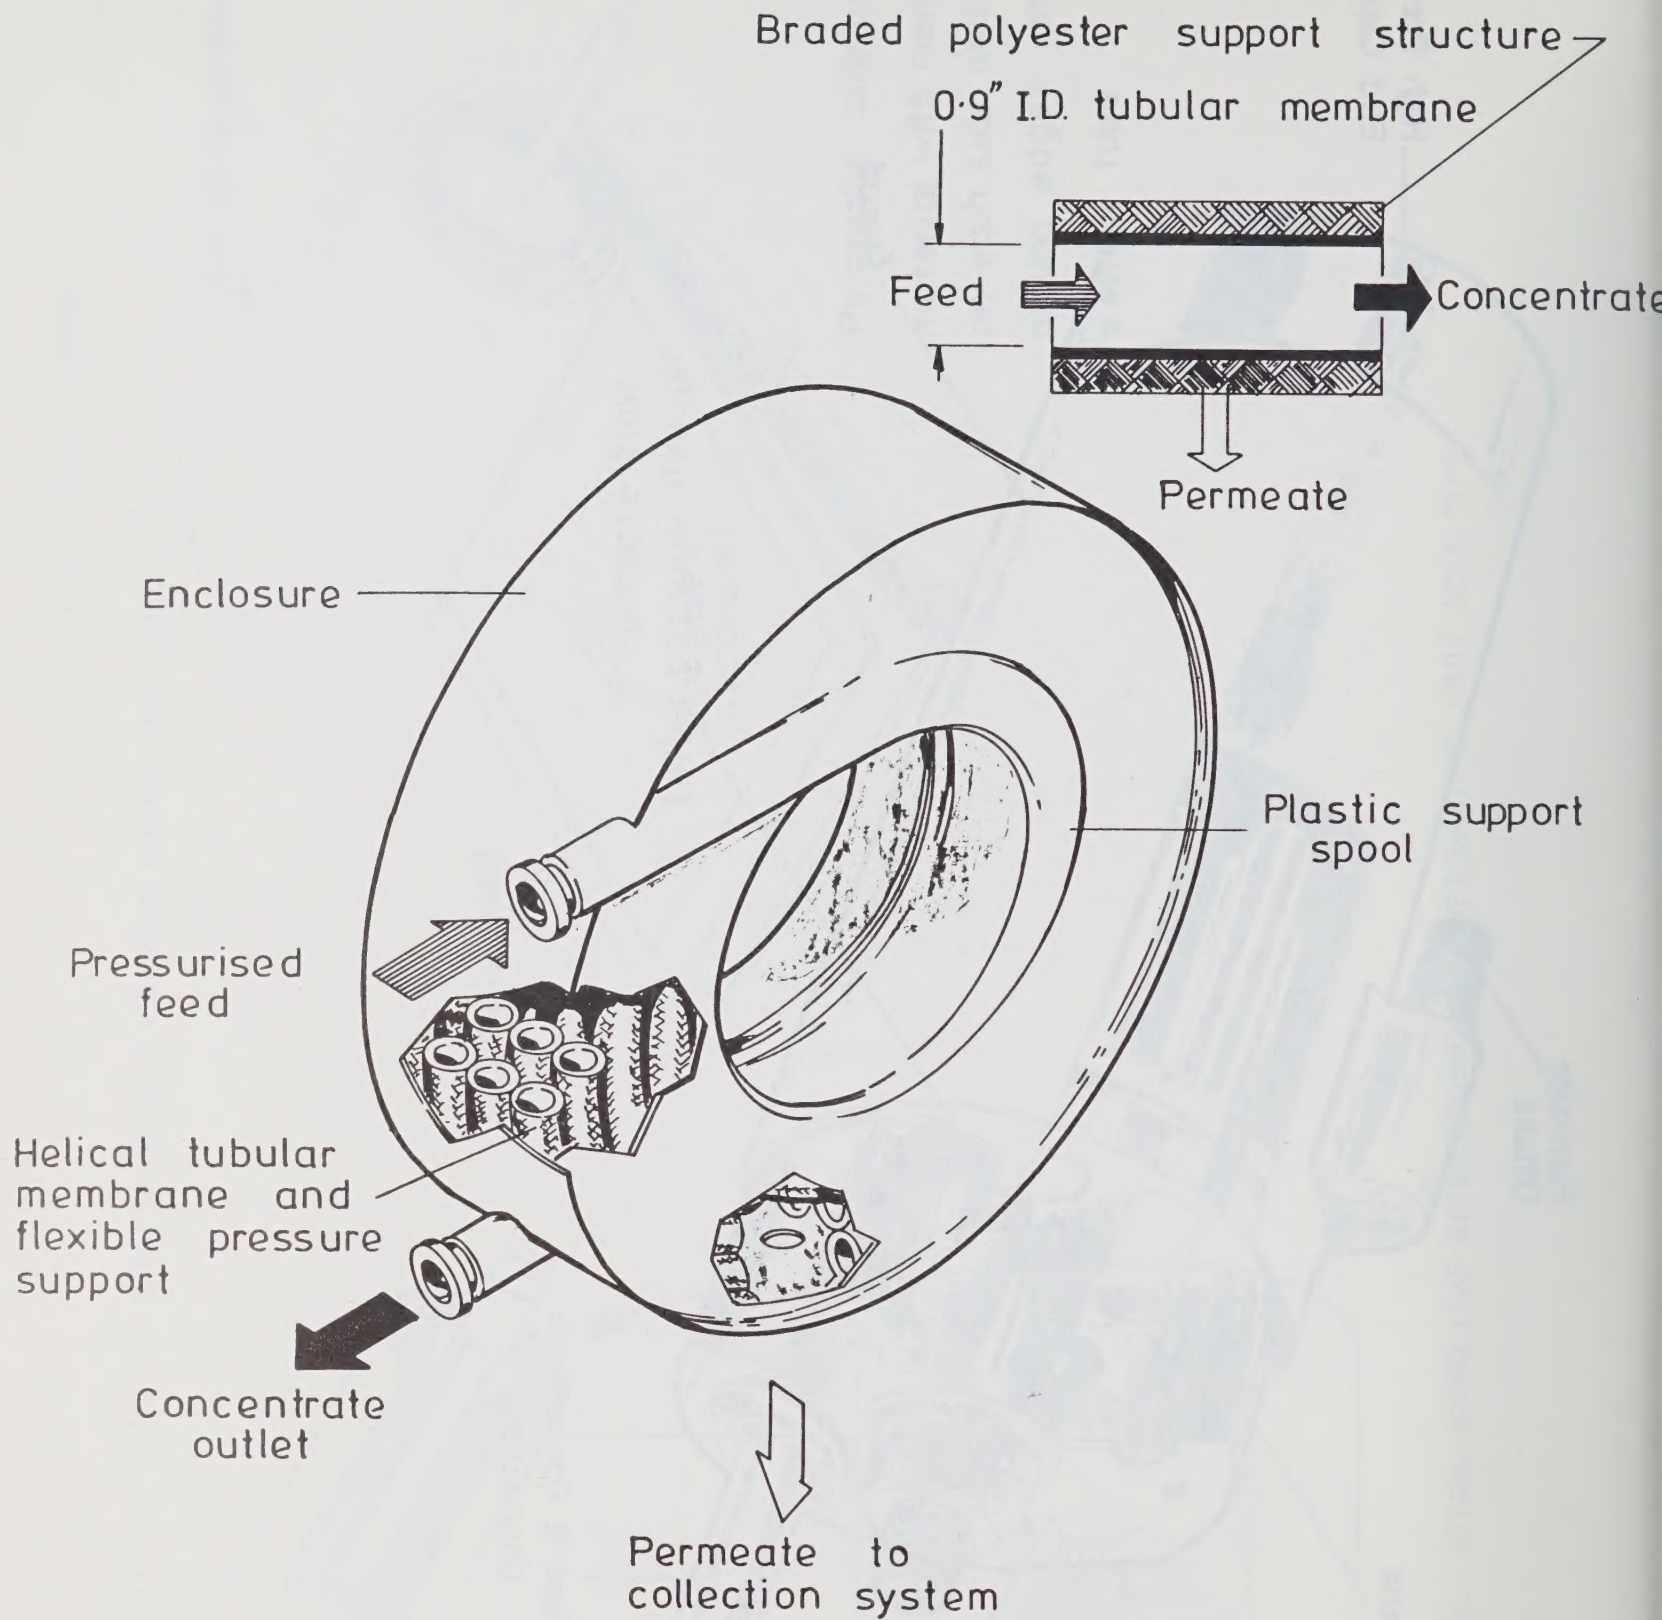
HELICAL TUBULAR REVERSE OSMOSIS MEMBRANE MODULE
